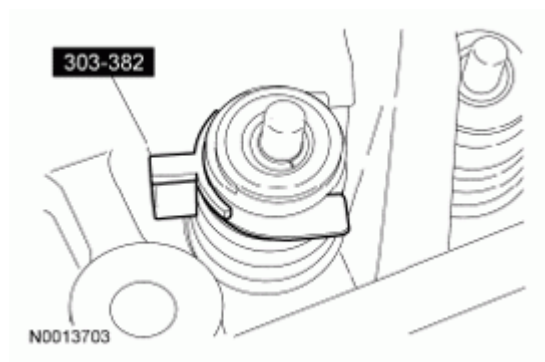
Identifying Valve Stem Oil Seal Installer And Valve Spring Compressor
